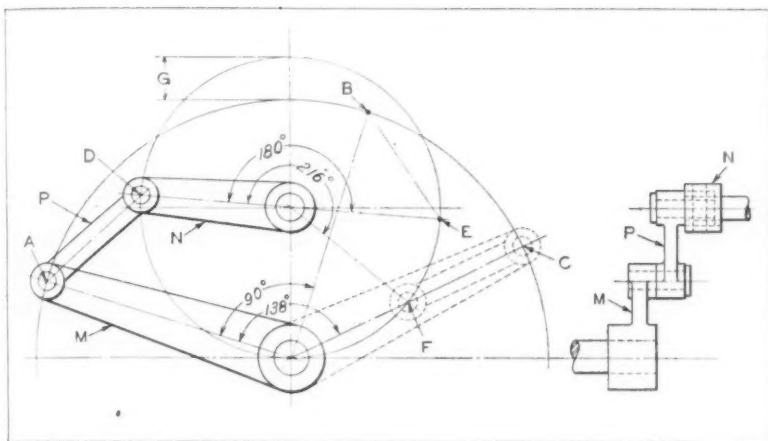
Crank-and-link Mechanism for Increasing Angular Movement of Driven Shaft
